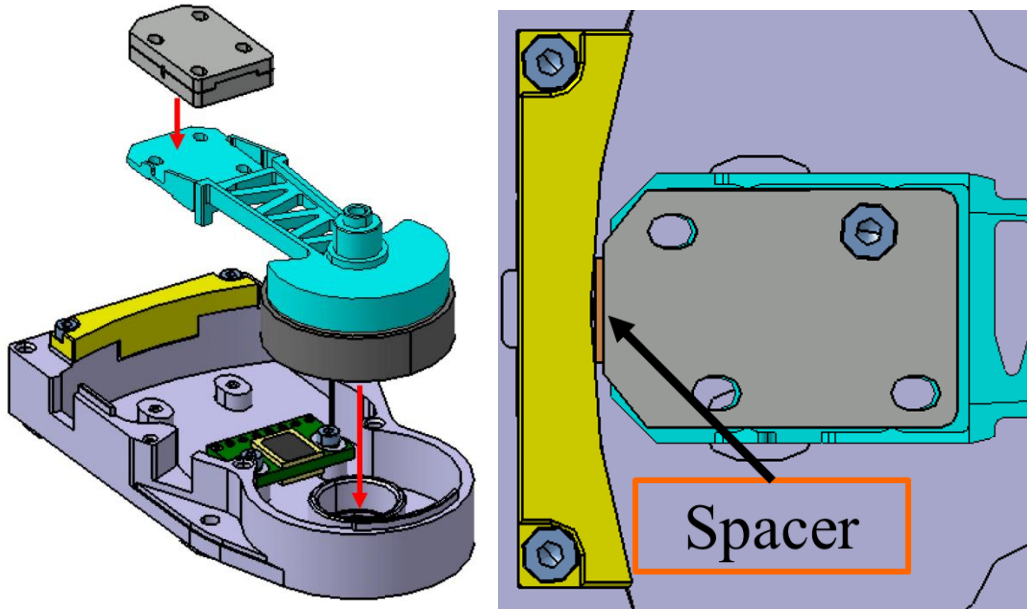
Fixing the motor and setting the preload distance.
